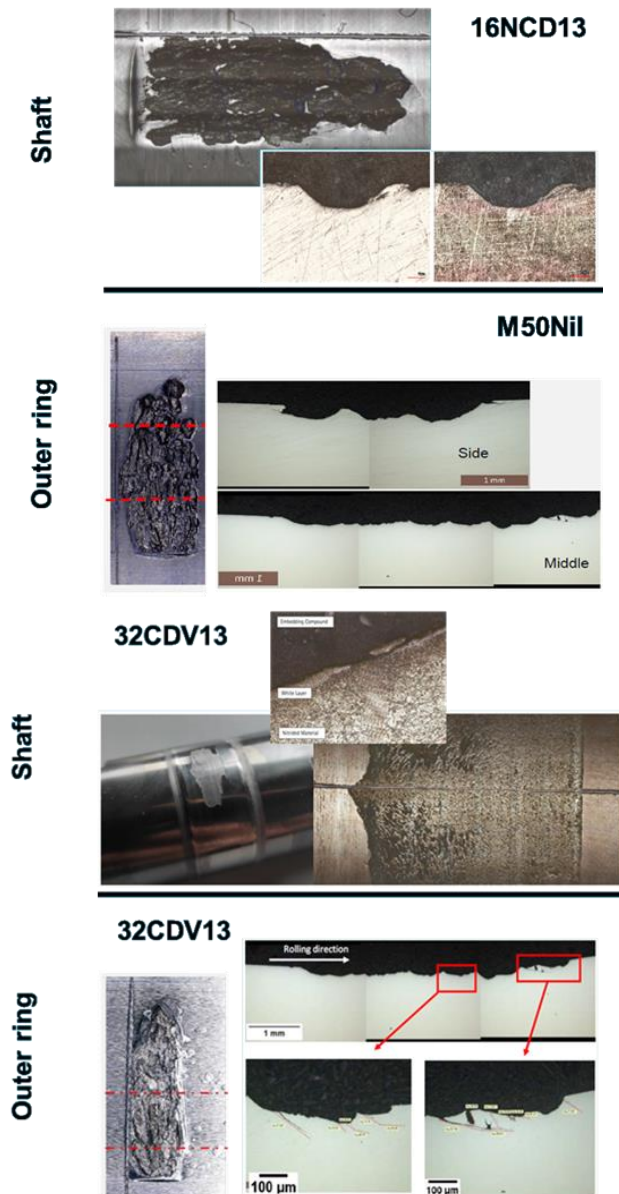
Typical spalling at ≥ 2.4 GPa; no crack propagation into depth [12]
